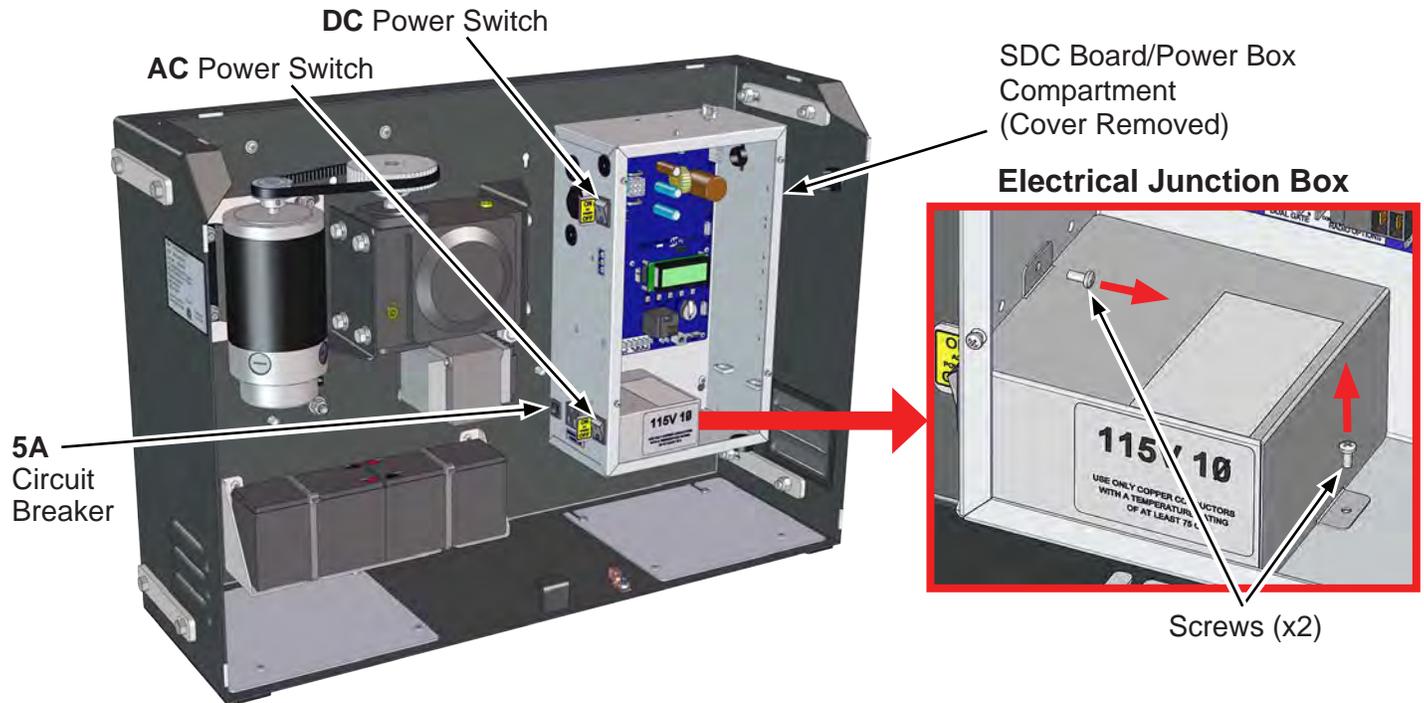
SlideSmart HD Operator with AC Power (Chassis Cover Removed)
